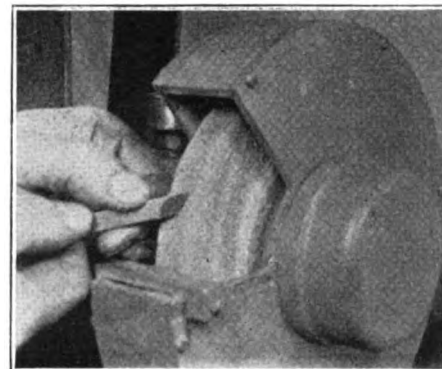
Sharpening Up a Threading Tool After Hardening.
